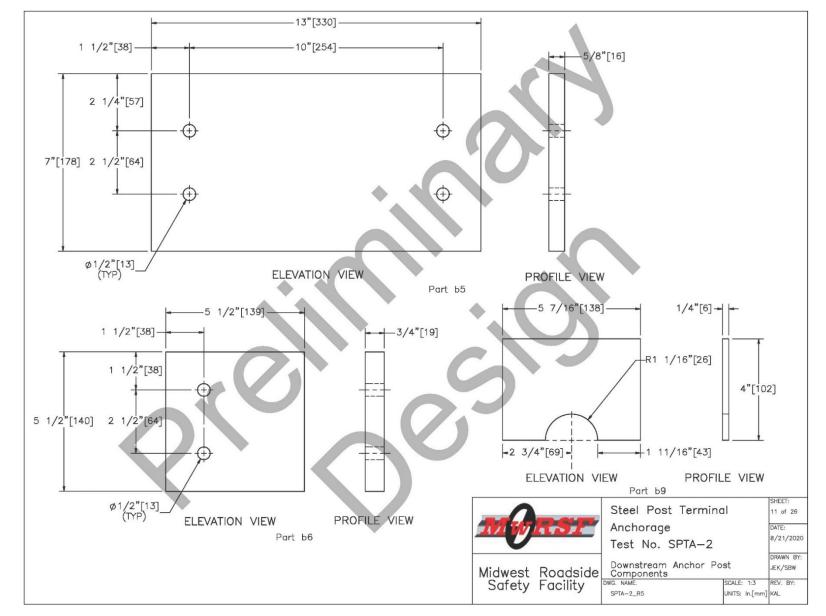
Downstream Anchor Post Components, Test No. SPTA-2
